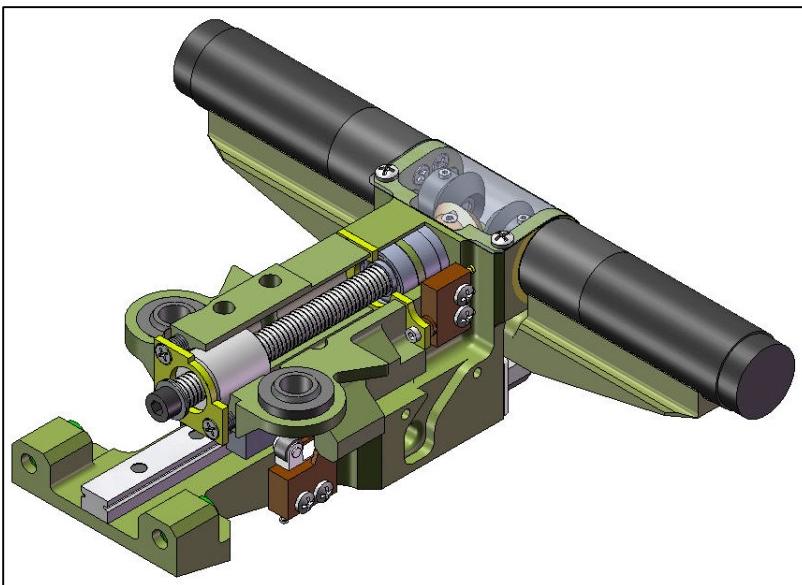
Motor Bracket assembly shown in the set-for-flight state
